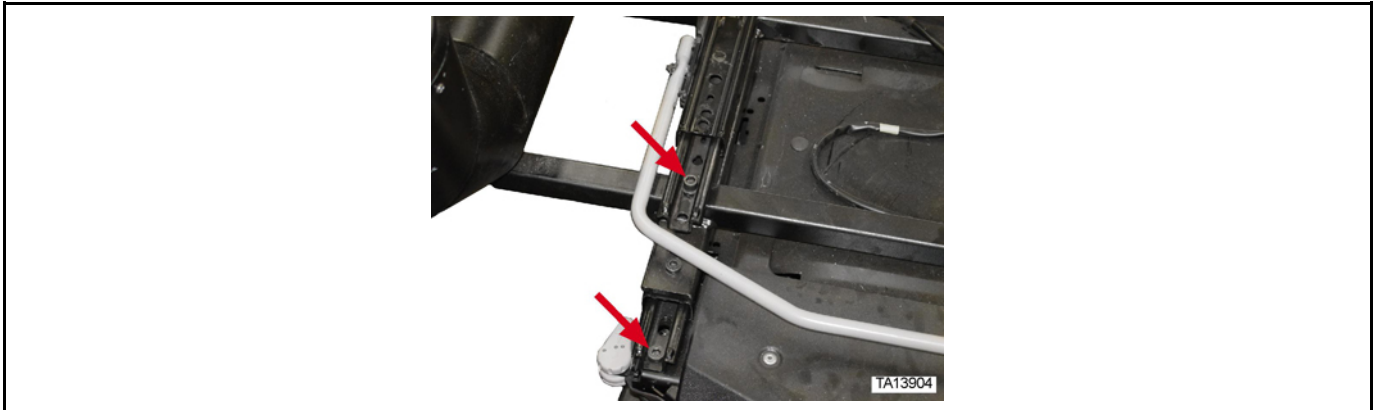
Allen-head screw at each corner of assembly securing spindle & pod
